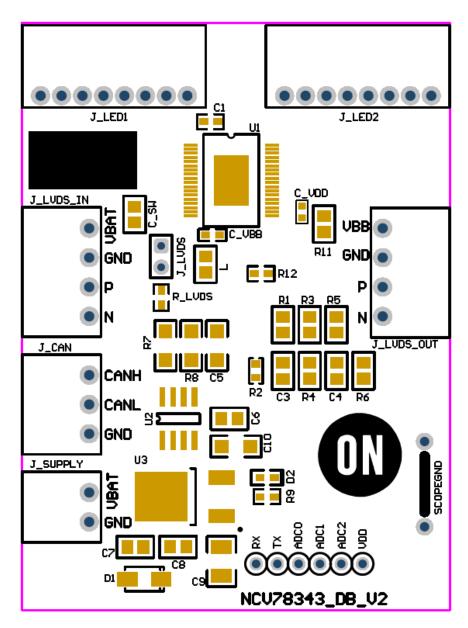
NCV78343R1DAGEVB Satellite Board Assembly Drawing
